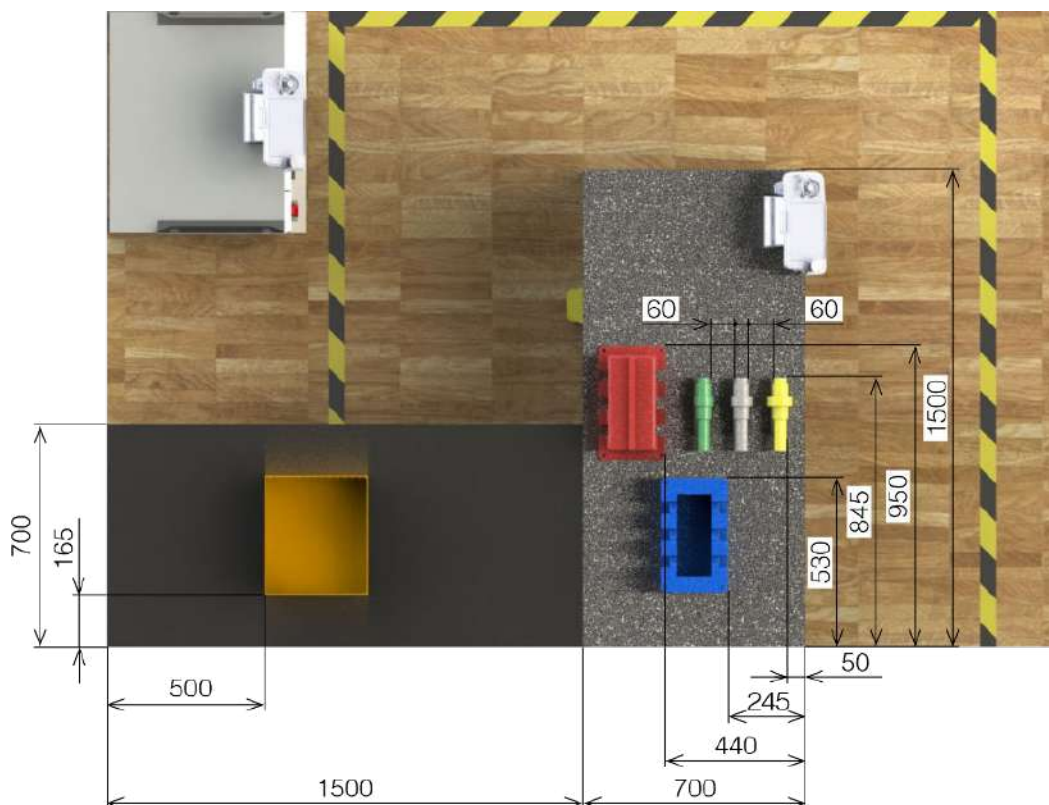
The dimensions of the tables and the location of the manipulated parts
